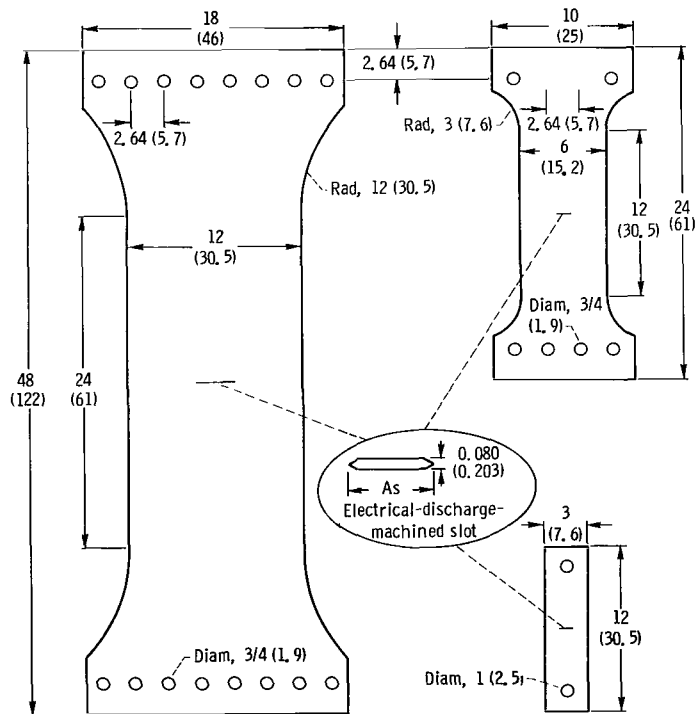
Fracture toughness specimens. (All dimensions are in inches (cm).)
